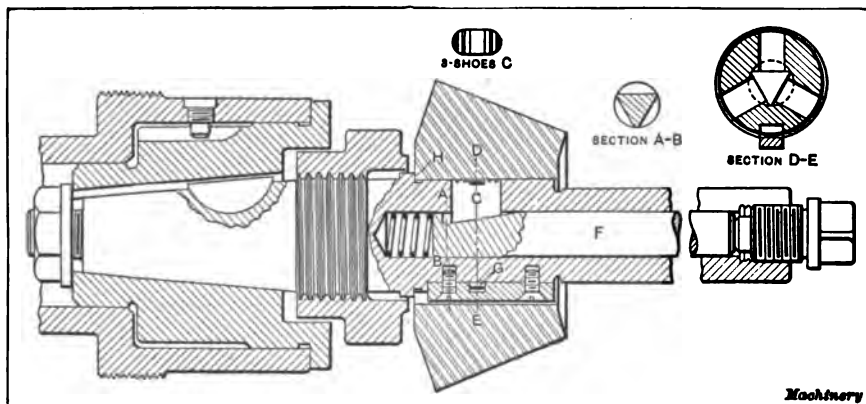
Arbor for Pinion Blanks equipped with Three Expanding Shoes
